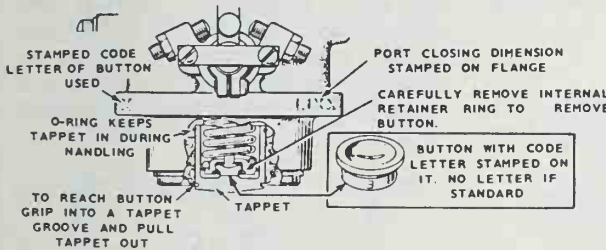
Identification of timing button codes and port closing dimensions are stamped on mounting flange of PSU injection pumps. Note placement of timing button under tappet. See text.
